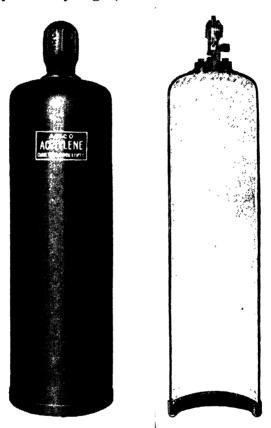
An Acetylene cylinder ready for shipment and a cut-away cylinder showing the porous filler and the fuse plugs at top and bottom of cylinder (Courtesy of: Air Reduction Salve Company)
